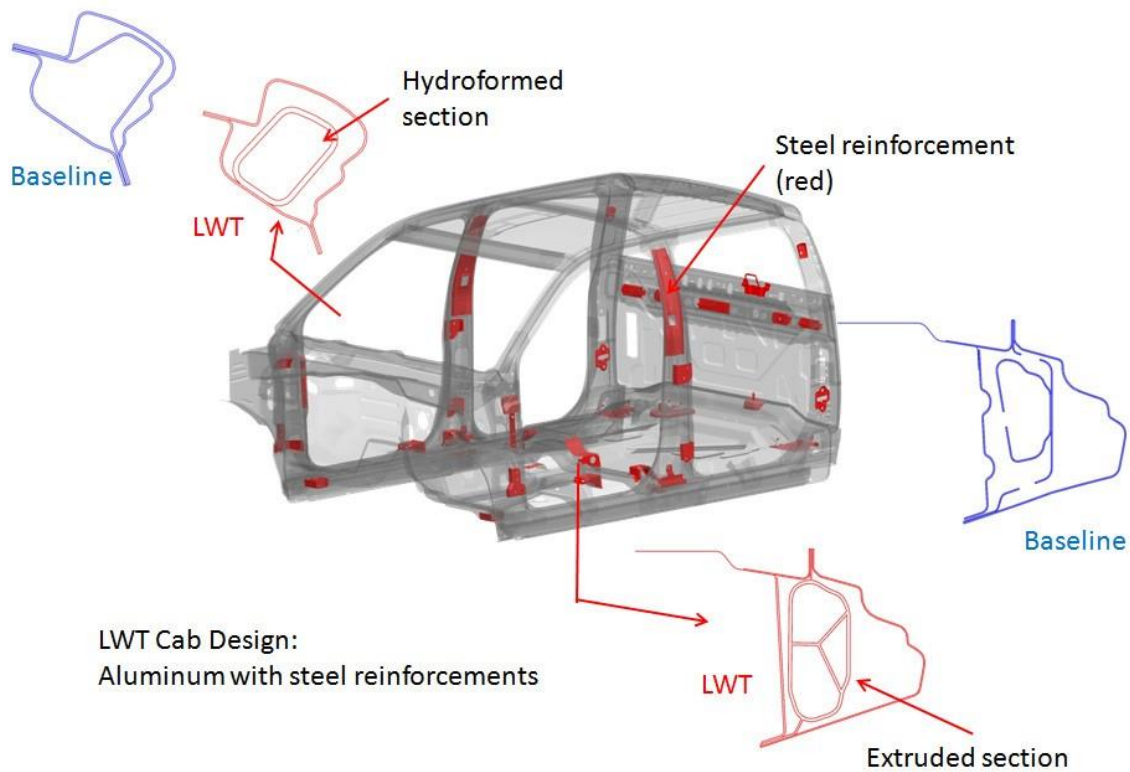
LWT Cab Design – Aluminum with Steel Reinforcements
